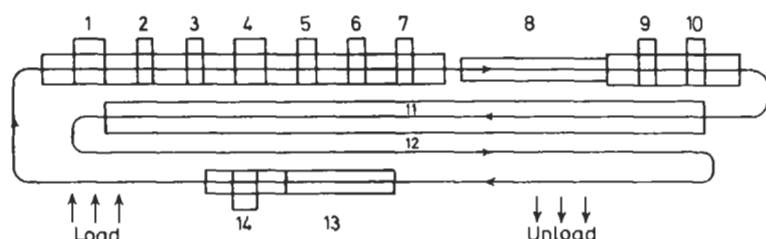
Typical plant layout for electropainting (courtesy Stein, Atkinson Stordy Ltd.)
